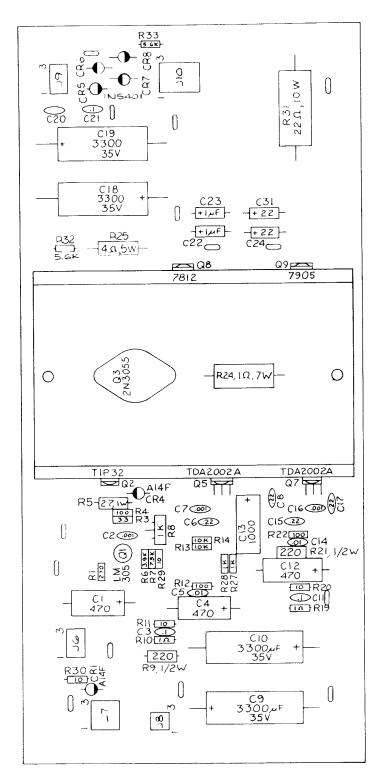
Cabinet-Mounted Assemblies A037201-xx D
